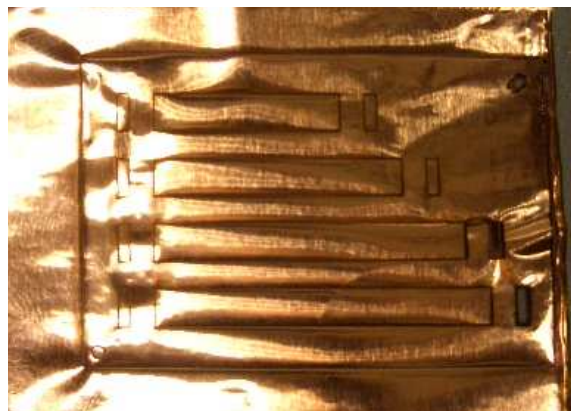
Result of induced warpage due to laser machining on copper shim stocks.
